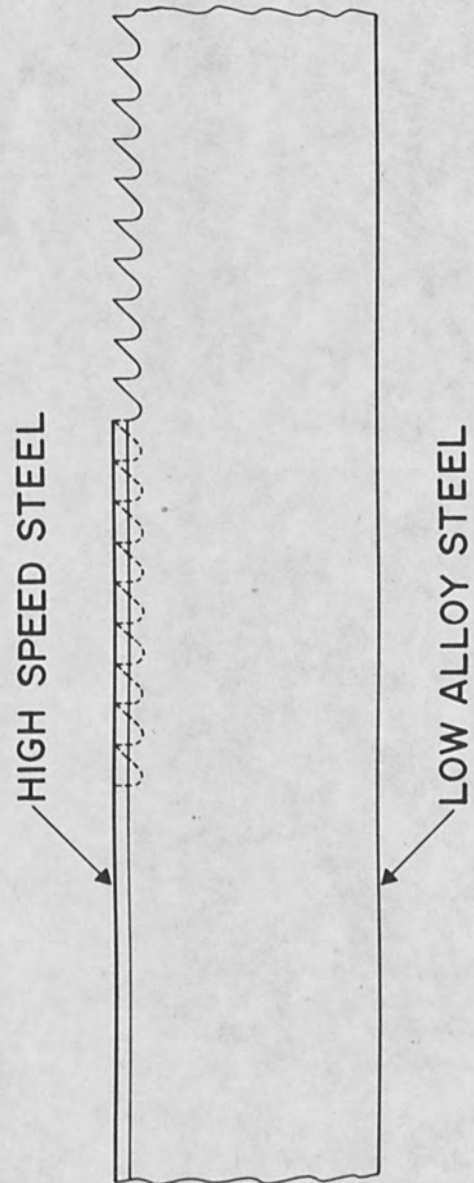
Electron Beam Welded Band Saw Blade.
